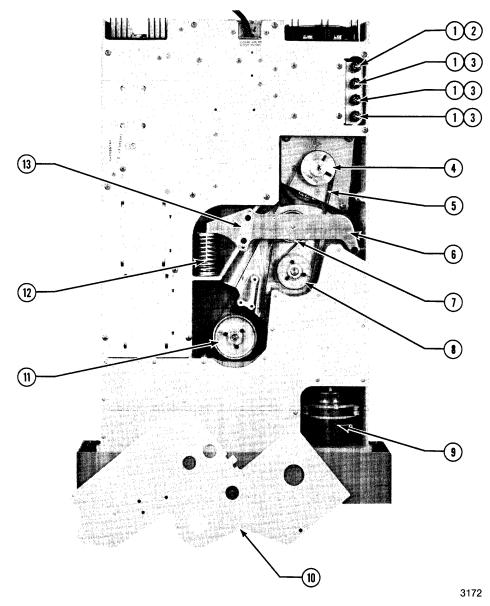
D3000 Extension Disk Drive, Photo Parts Index, Bottom View
